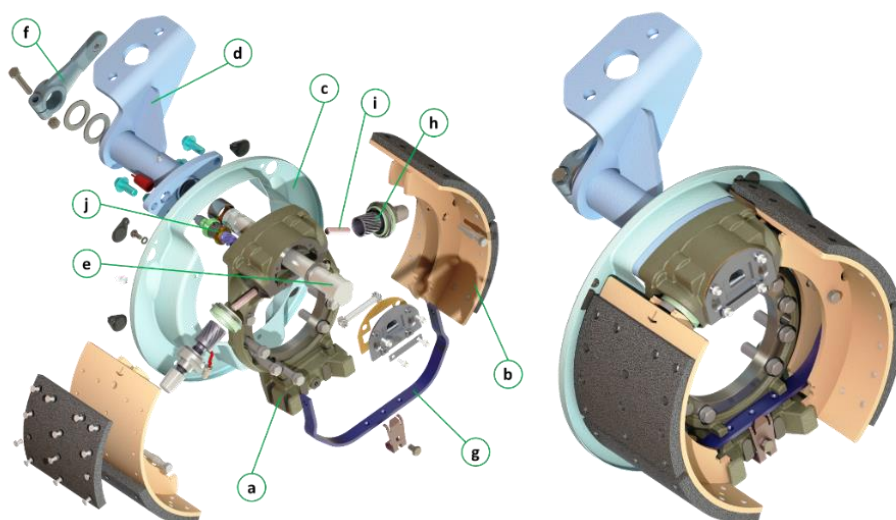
Z-cam drum brake components: (a) torque plate, (b) leading and trailing shoes, (c) dust shield, (d) shaft bracket, (e) camshaft, (f) lever, (g) C-spring, (h) tappet heads, (i) struts and (j) parts of automatic adjustment mechanism
